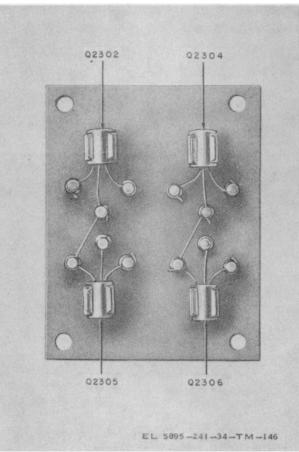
Power Supply PP-2795/FSW-8, terminal board TB2SOS, parts location.
